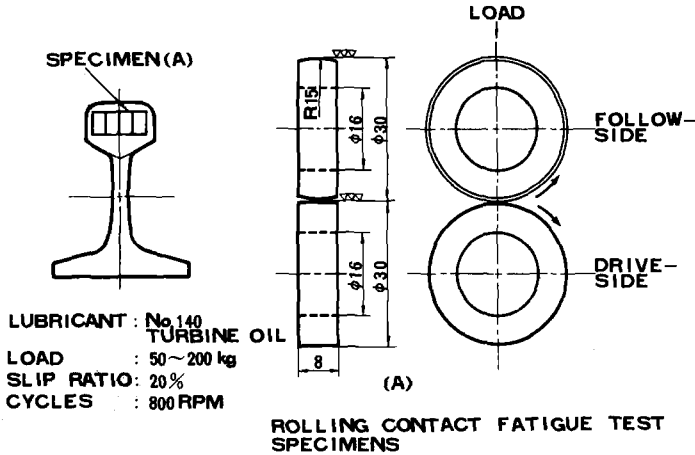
Rolling contact fatigue test, specimens, and test method.
